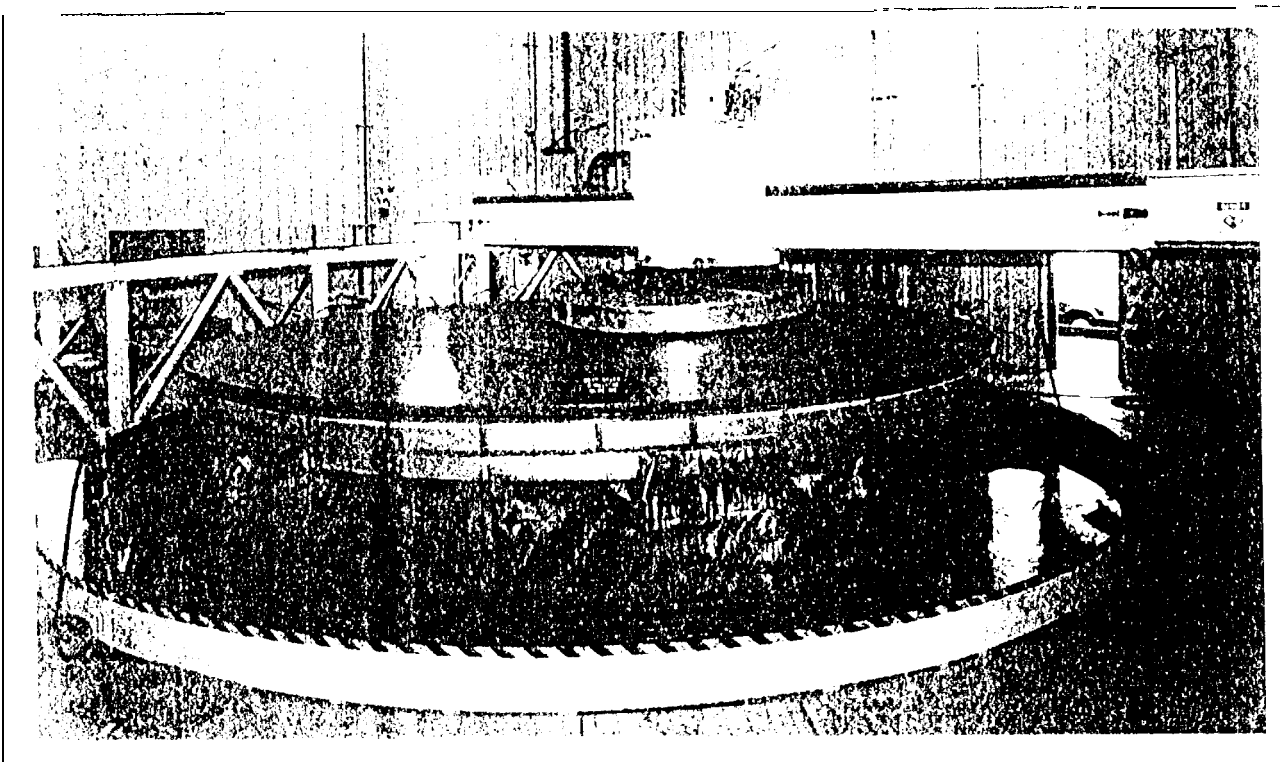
The Grinding/Polishing Machine Used for Refinishing of the Collimating Mirror
